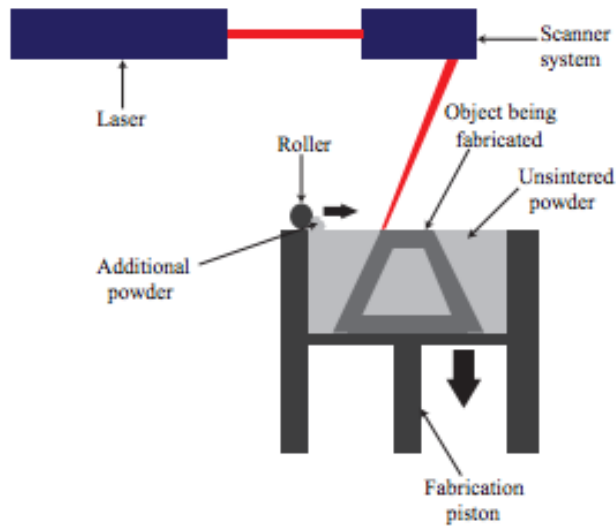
Schematic drawing of selective laser sintering process [49]
